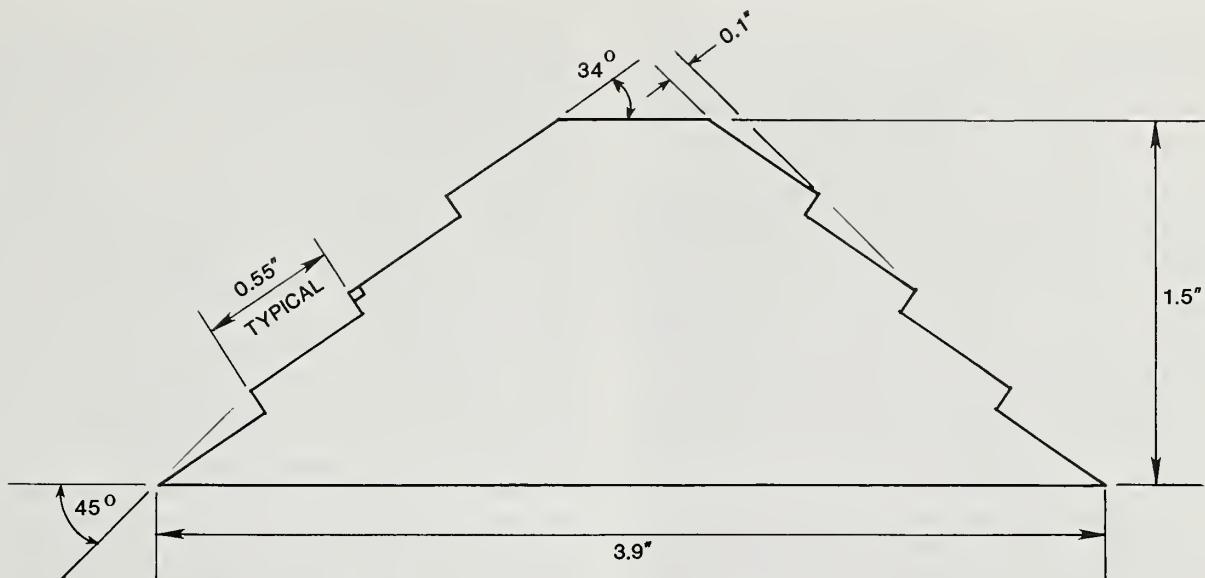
One design of edge profile for components of 1.5-inch-thick panels; these components will be cut from half cylinders with diameters (after kiln drying and crook removal) of 4 inches. Profiles for components of panels of other thicknesses will be similar, but not identical. Alternative toothed patterns are possible.
